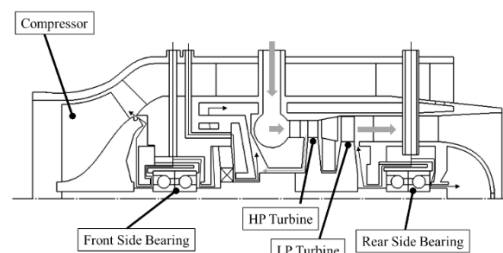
Cross-sectional View of the GG-ATR Engine.
